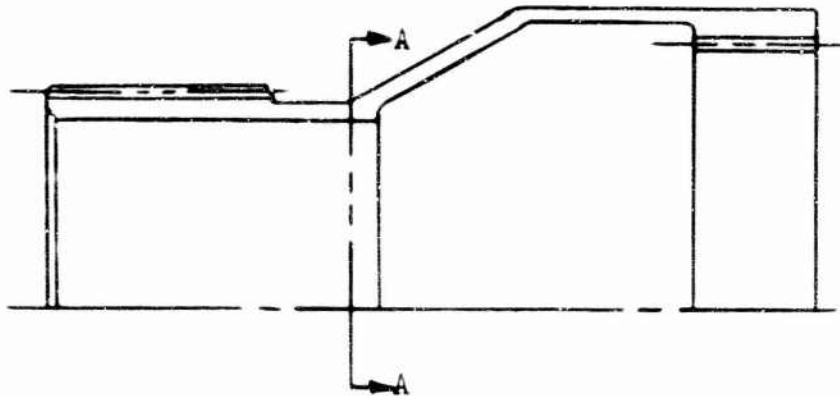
Quill Shaft (Input Bevel to Freewheel Shaft).
